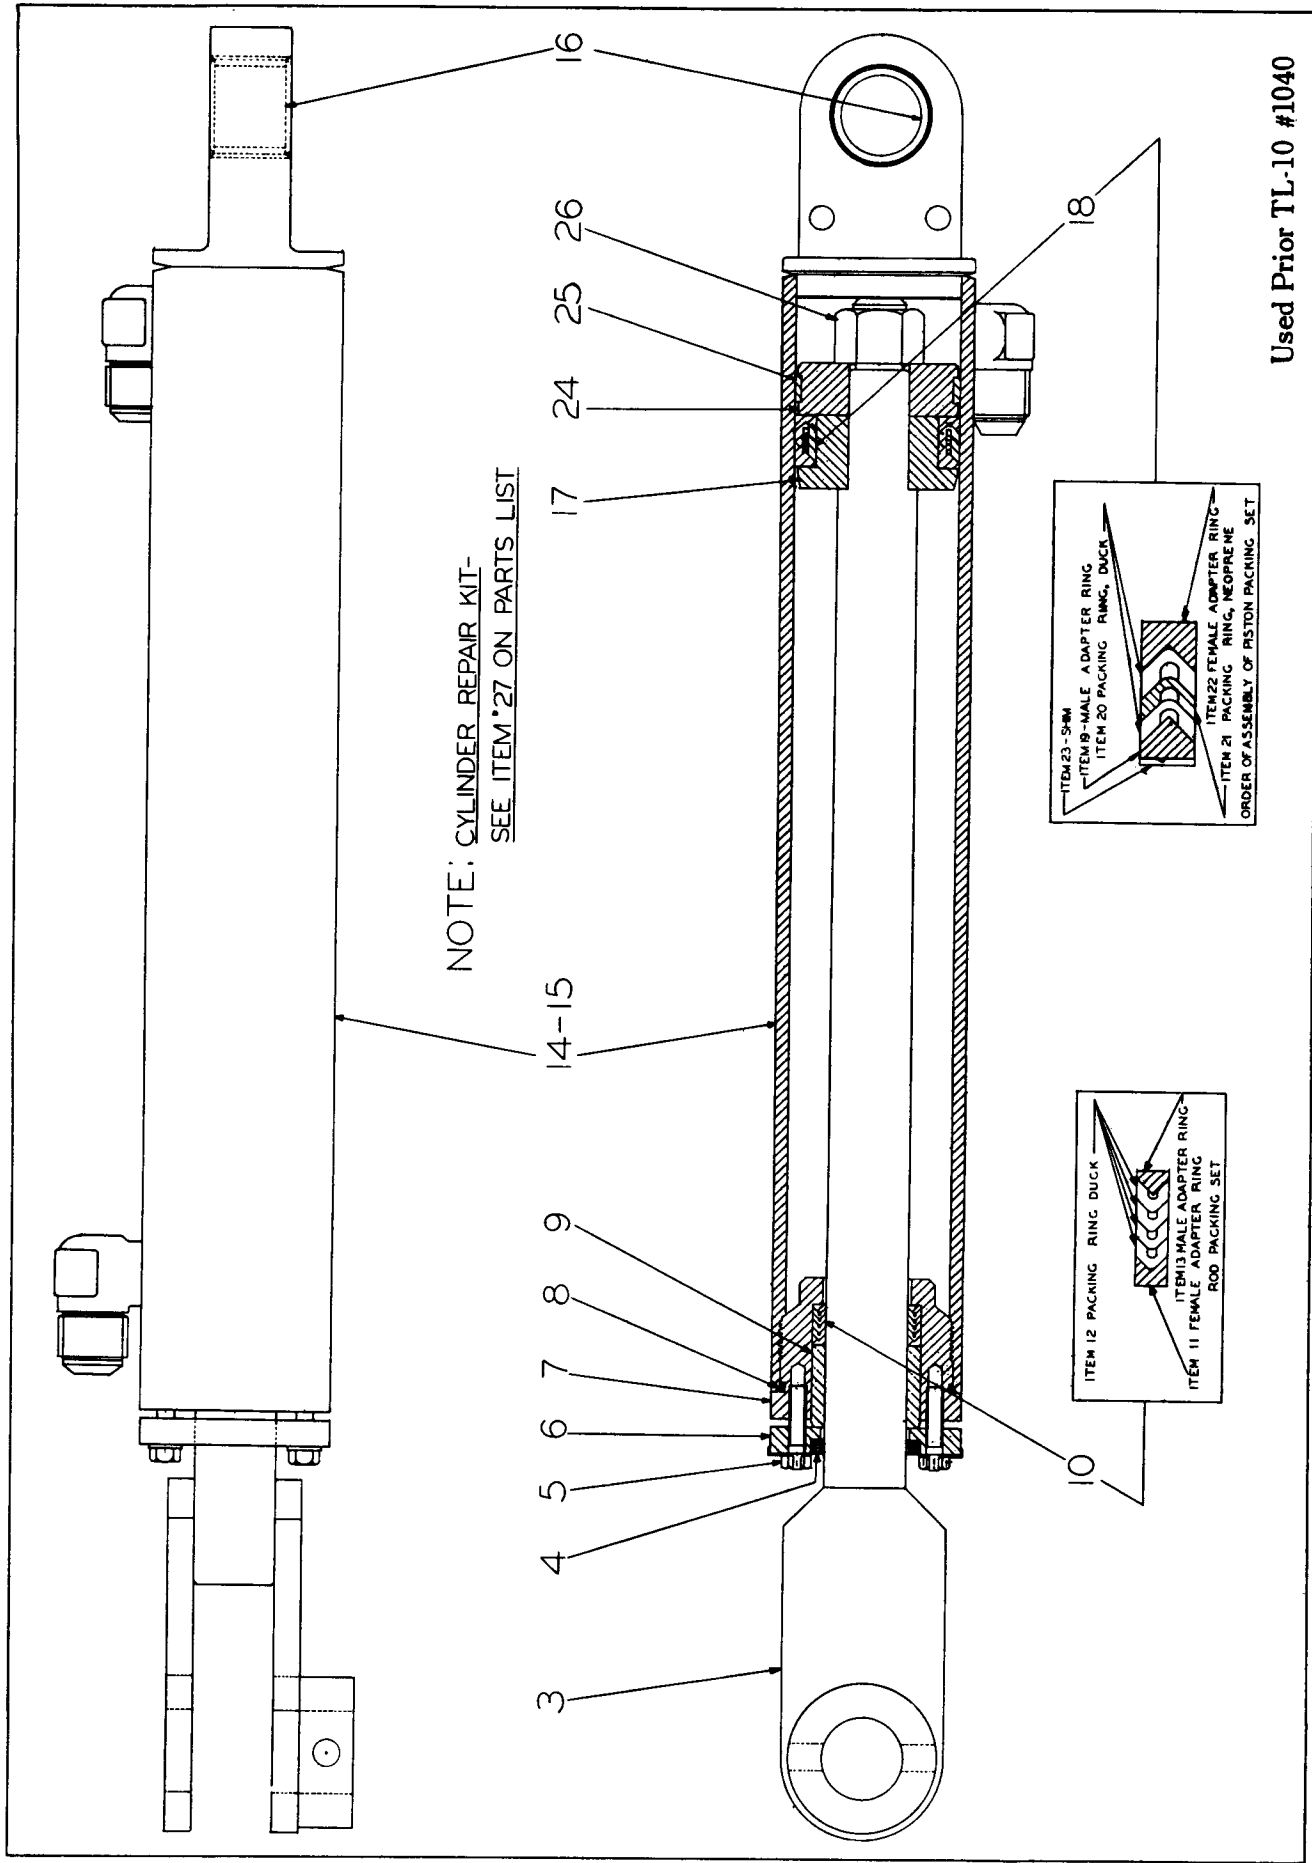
DUMP CYLINDER ASSEMBLY - LEFT AND RIGHT
